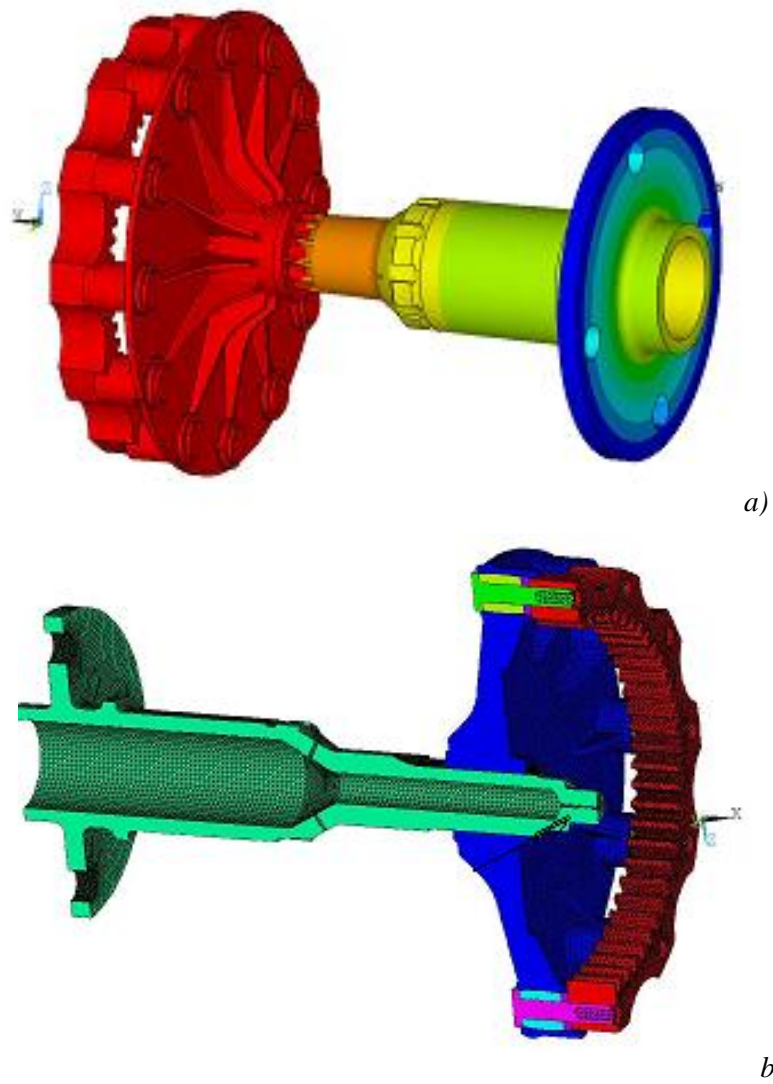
Propeller shaft of airplane engine: a) 3D view; b) Its cross-sectional view.
